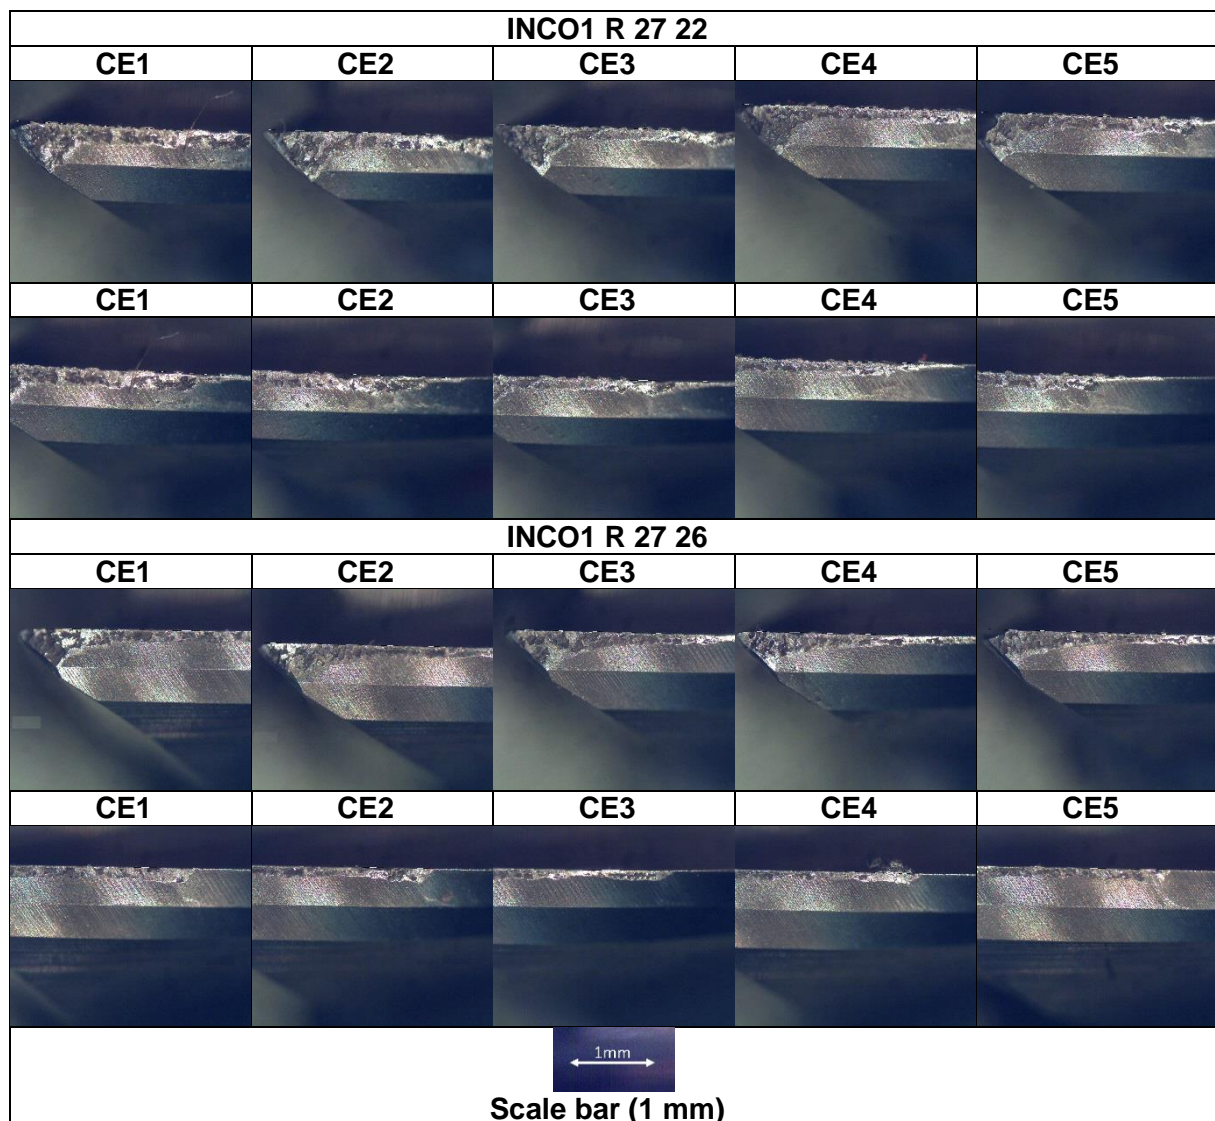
Examples of flank wear, chipping and BUE on the cutting edges when milling Inconel 718
